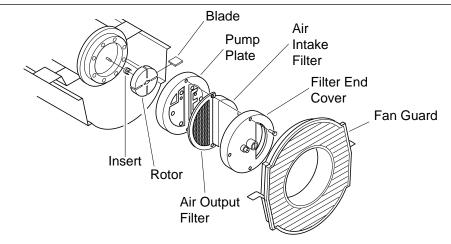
Rotor Location, 70,000 BTU/Hr Model
